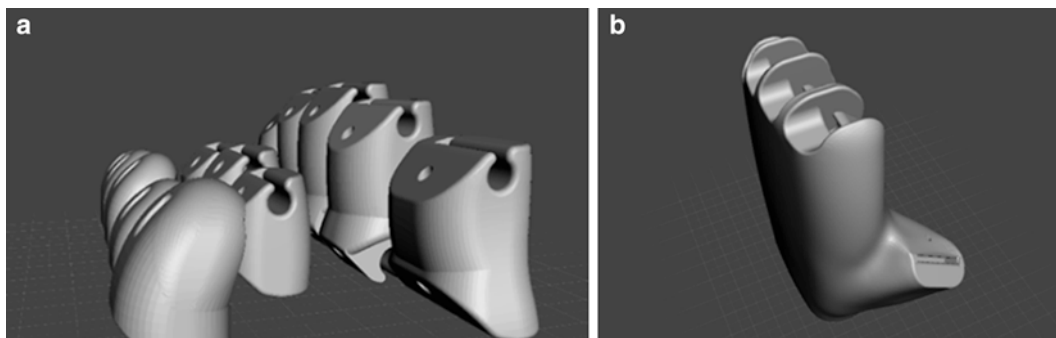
Hand flawless, sectioned with apertures for joints (a) Fingers. (b) Palm
